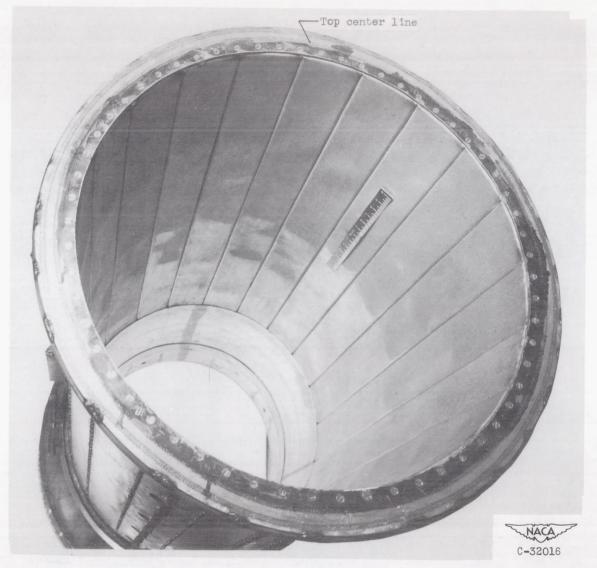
Interior view of experimental transpiration-cooled afterburner with porous combustion-chamber wall fabricated from brazed and rolled wire cloth. Exhaust nozzle removed.
